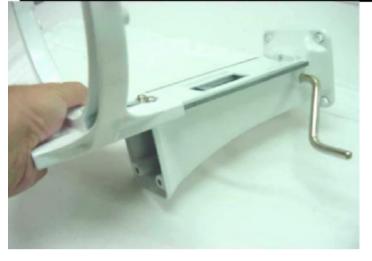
Remove the four round head screws from the base to remove the bowl lift assembly.
